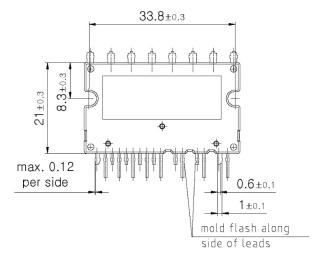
Package outline dimensions (DCB) (Unit: [mm])
